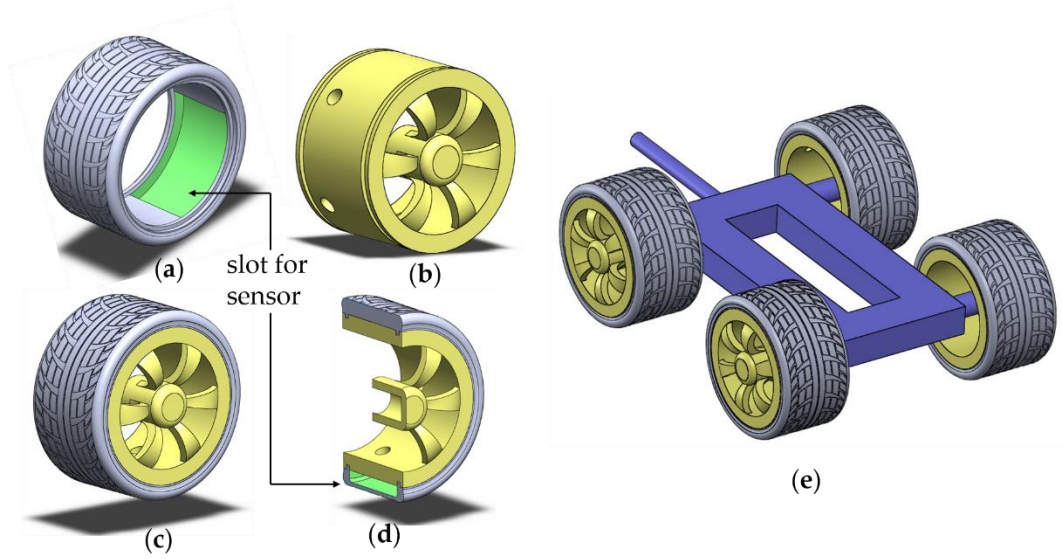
Tire assembly 3D model: (a) tire with a slot for sensor; (b) wheel with hole for wiring; (c) tire-wheel assembly; (d) sectional view of the assembly; (e) tire, wheel, and chassis assembled [68].
